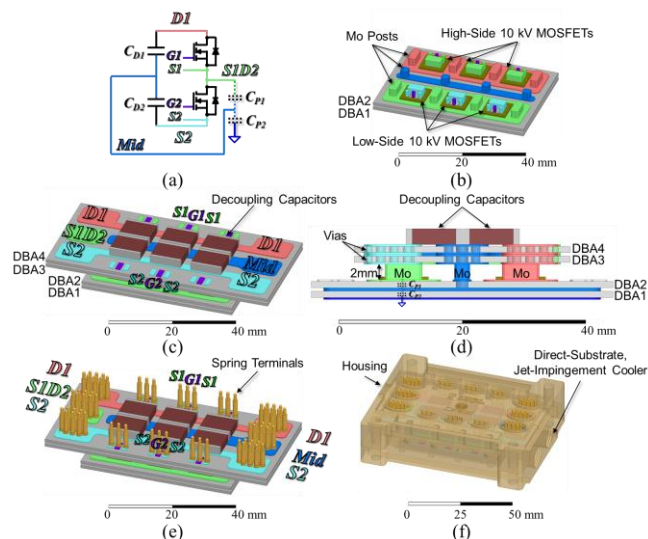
(a) Schematic and 3D models of the (b) bottom and (c) complete assemblies, (d) side-view of the module, (e) terminal arrangement, and (f) housing with integrated cooler. The colors in the 3D models
